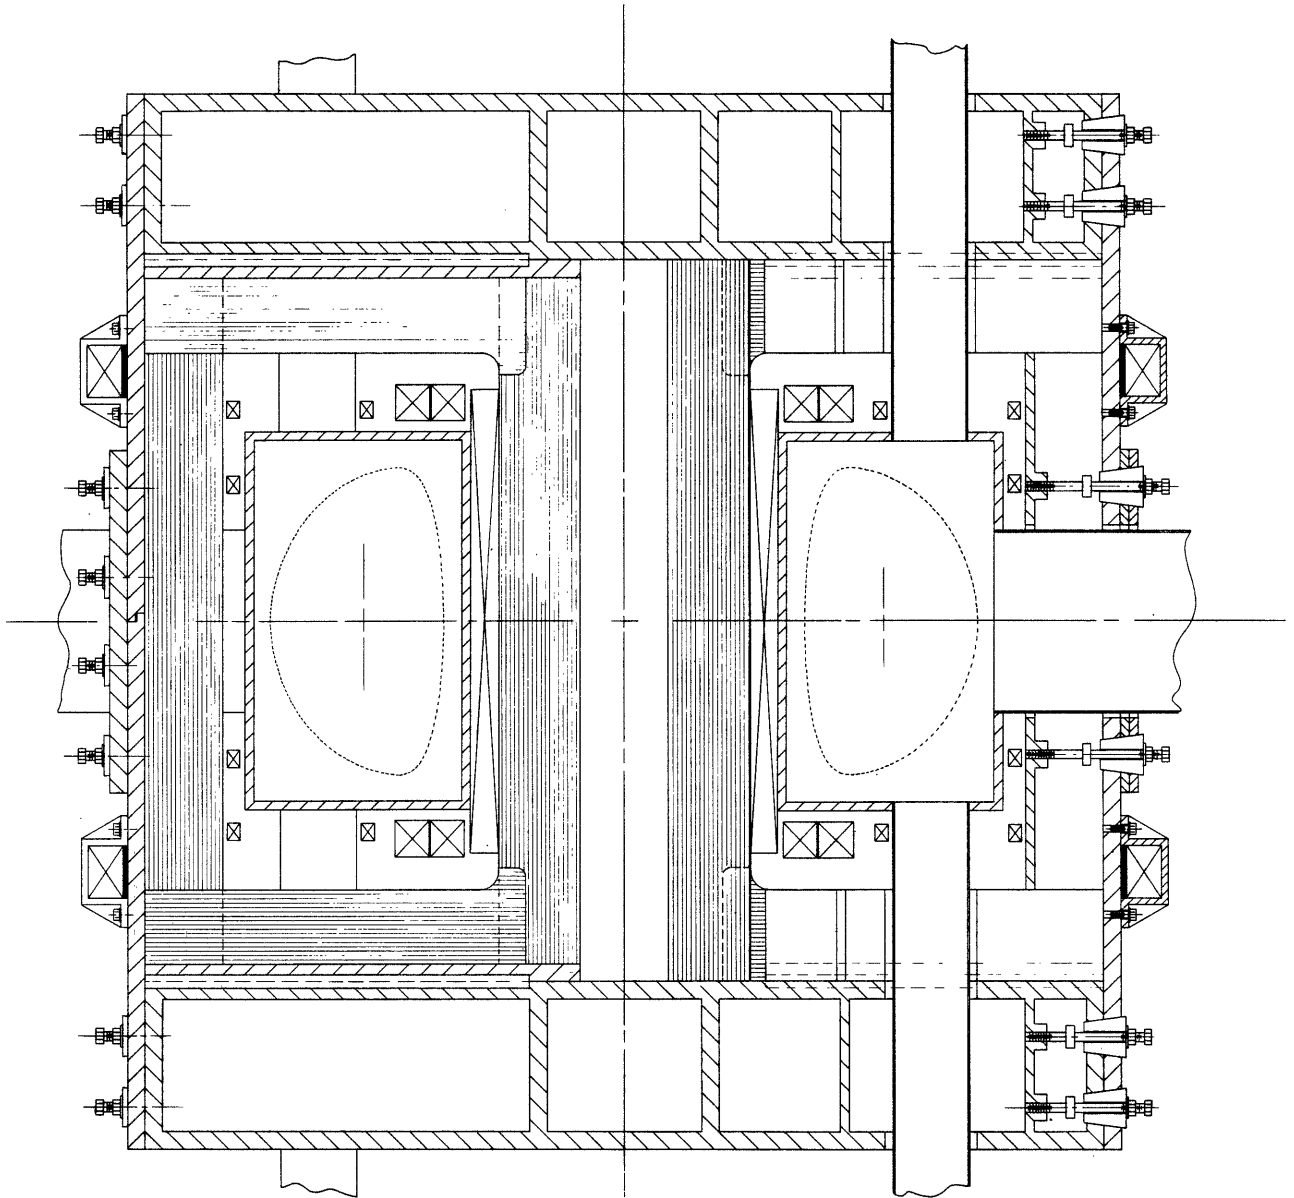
C-MOD TF picture frame coil concept utilizing Alcator C like joints at the four corners
